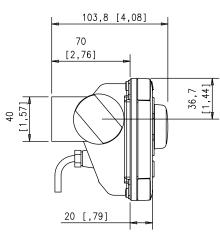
AP25 Control Unit – dimensions (Mounting bracket is optional equipment)
